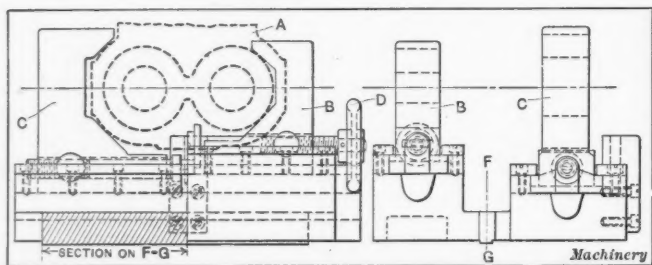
Milling Fixture used for holding the Cylinder Castings in the Machine shown in Fig. 2
